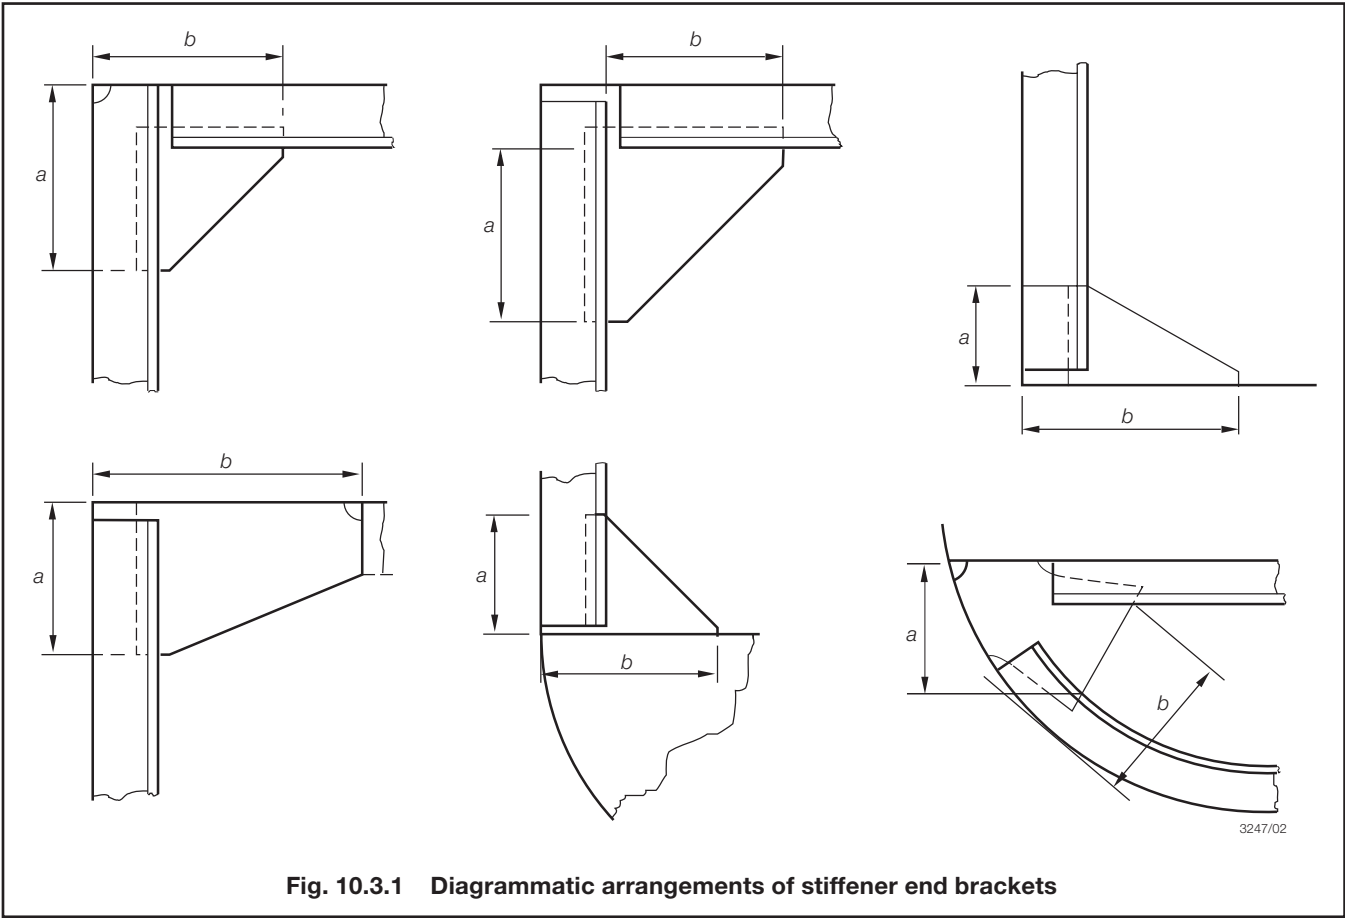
Diagrammatic arrangements of stiffener end brackets
